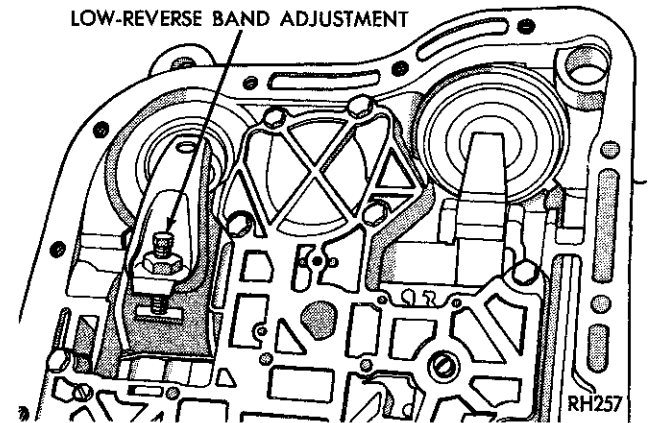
Rear Band Adjustment Screw Location VALVE BODY
